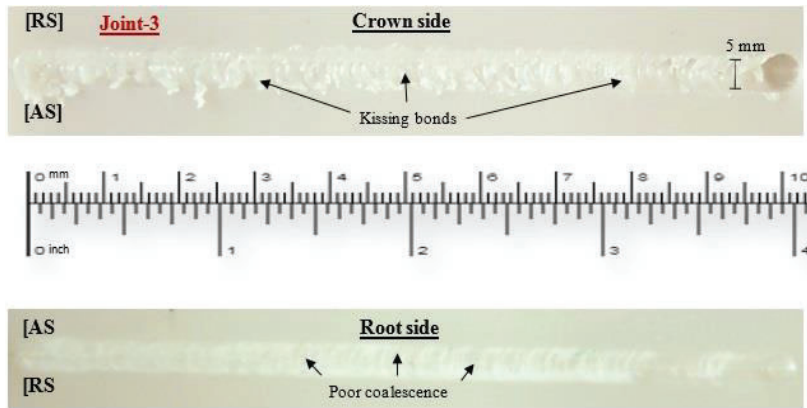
Joint-3 material flow, surface finish, and surface defects
